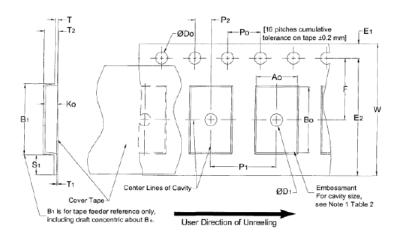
8, 12, 16 & 24 embossed carrier dimension
